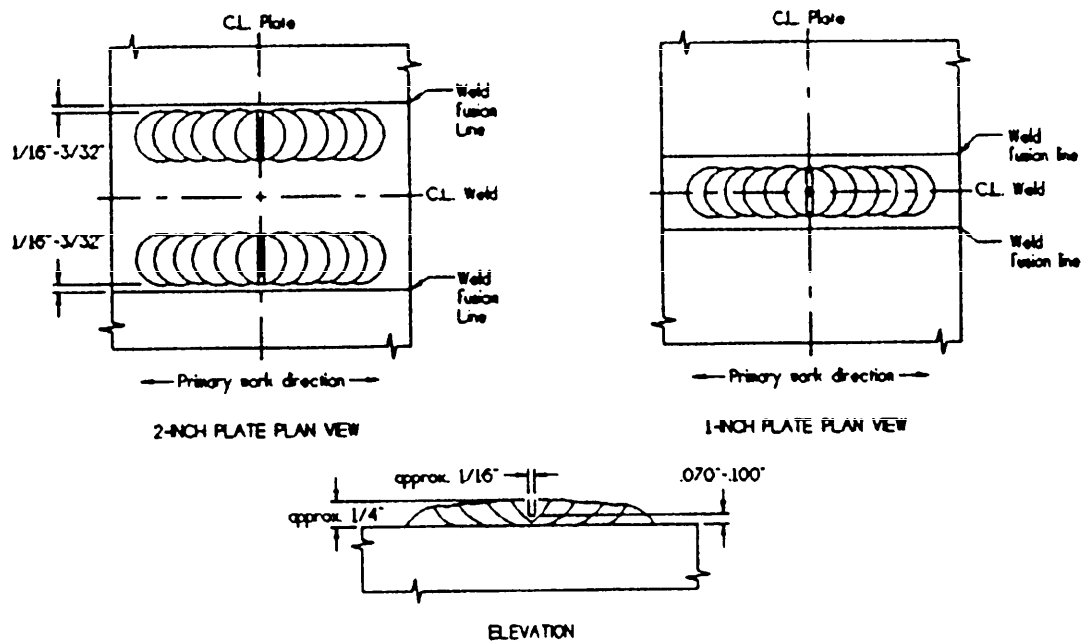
BASE METAL EVALUATION INCORPORATING A WELD JOINT
